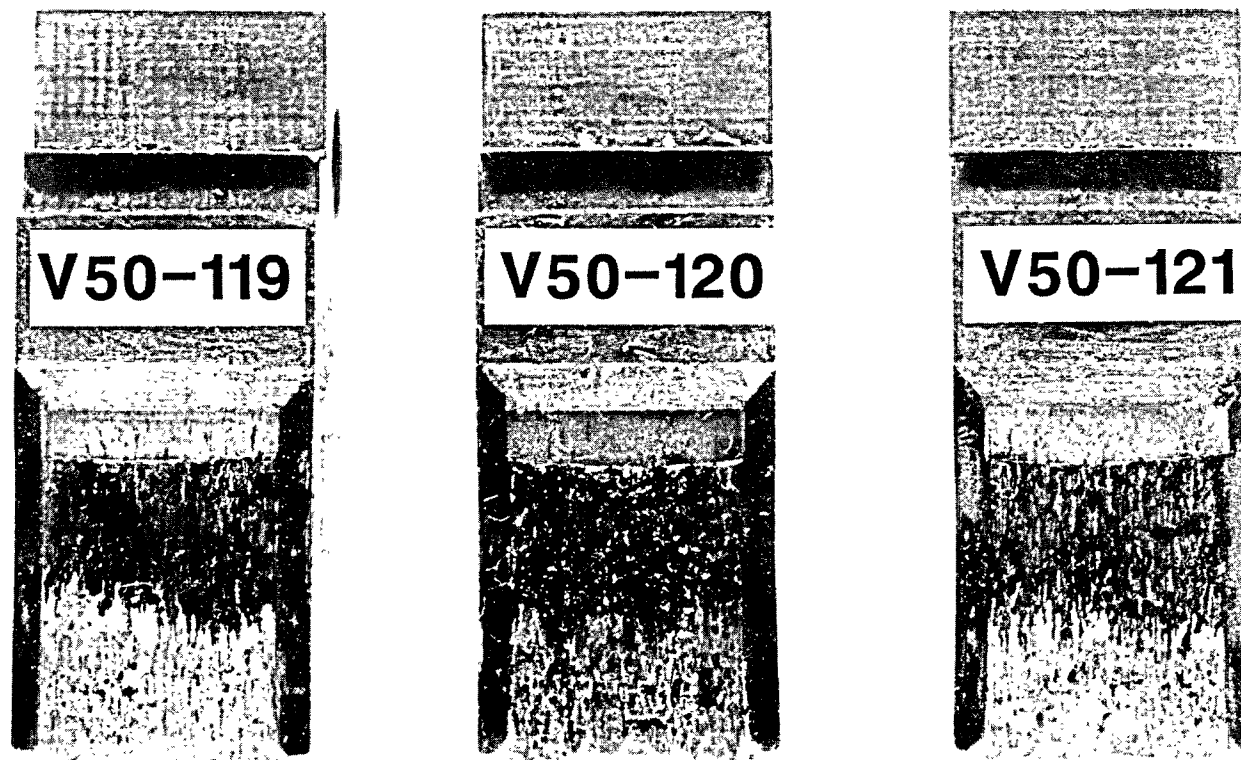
Fracture surfaces for the δ_5 check-out tests. Specimen V50-119 (left) had δ_5 measurements (and holes).
